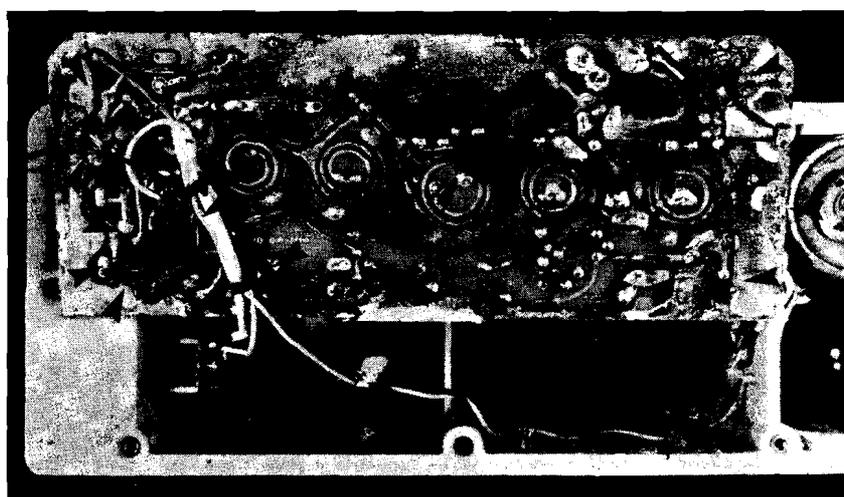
Typical PCB damage due to SO₂ induced corrosion.
